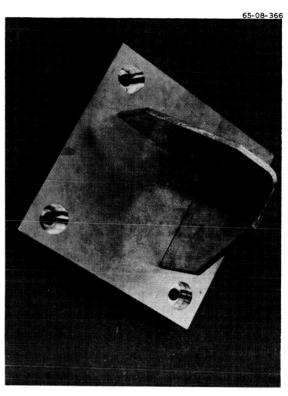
Bracket Mounting, SW. No. 1, D9432646
